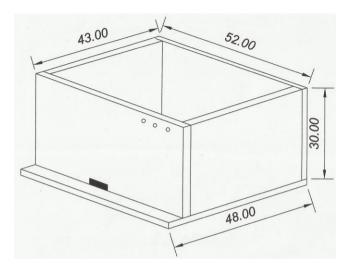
Tanzania top bar hive with flight entrance on the floor and wall (All dimensions are in centimeters).
